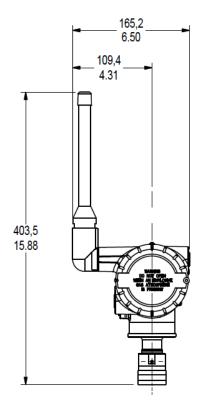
In-Line, typical mounting dimensions for STAW74L (4 dBi antenna shown)
